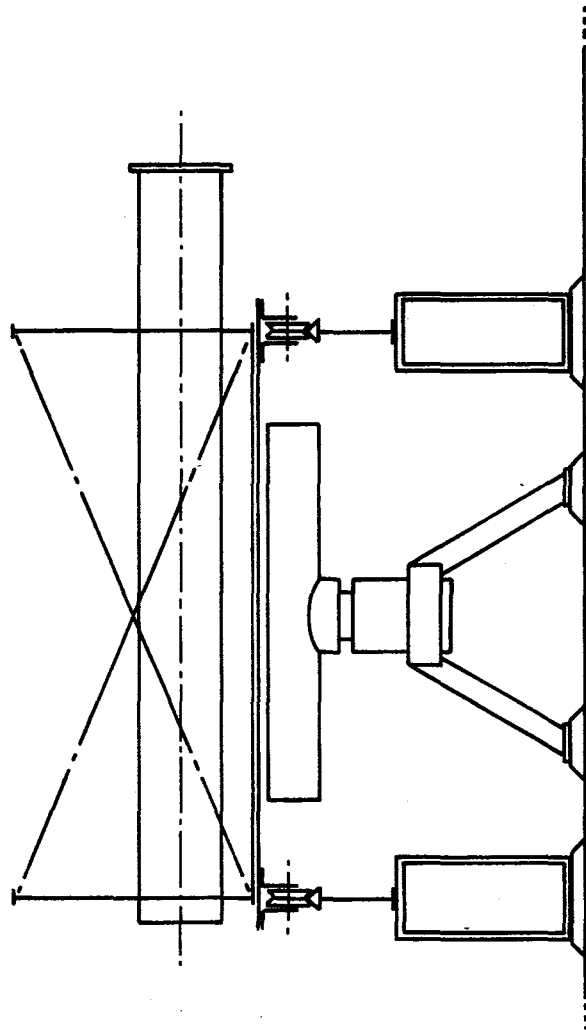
24 ASSEMBLY OF HALF-FRAME AT STATION No.1
